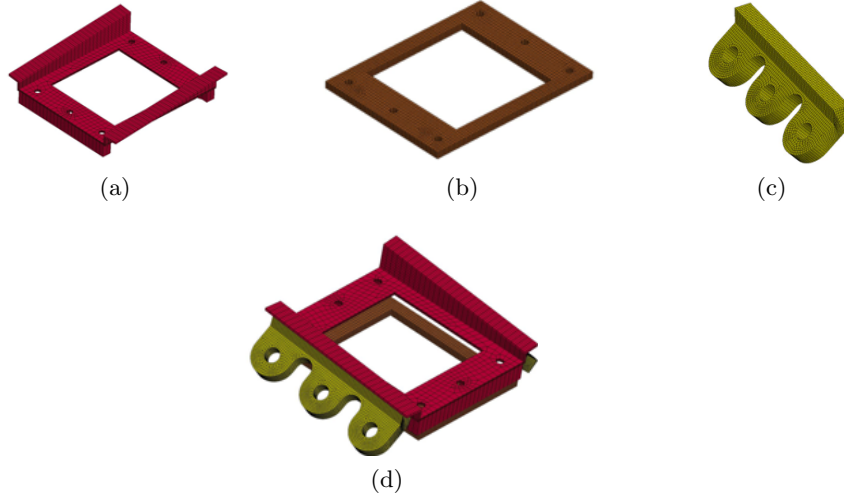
Clamp subcomponents: (a) FE mesh of the front clamp; (b) FE mesh of the back clamp; (c) FE mesh of the helmet fixture; (d) FE model of the assembled subcomponents.
